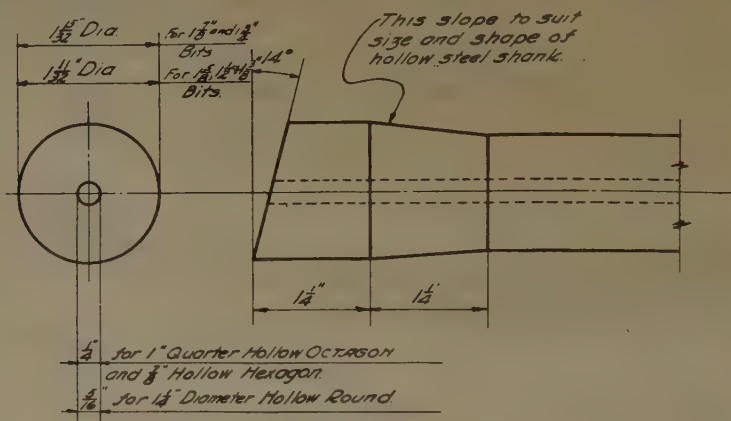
FORGED BIT END OF HOLLOW DRILL SHANKS.
